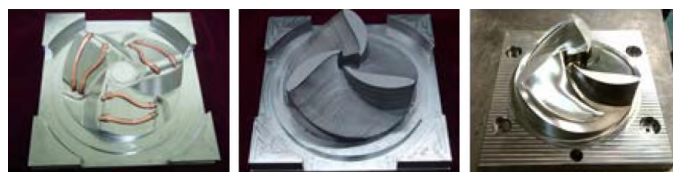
Conformal cooling channels in an injection molding die. The cooling tubes were inserted into the substrate mold (left), the tubes were ‘buried’ and the die was completed using a laser-aided metal-based AM process (center), and the final tool was post-machined (right). Adapted from [59].
